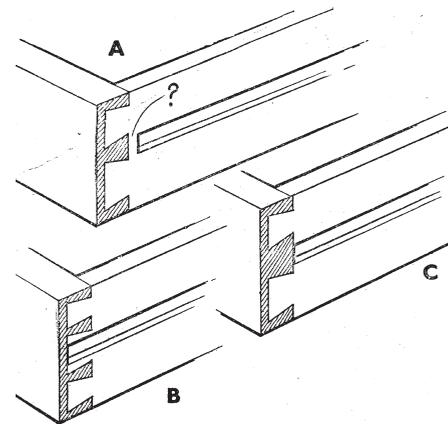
DRAWER WITH SUSPENSION RUNNERS
